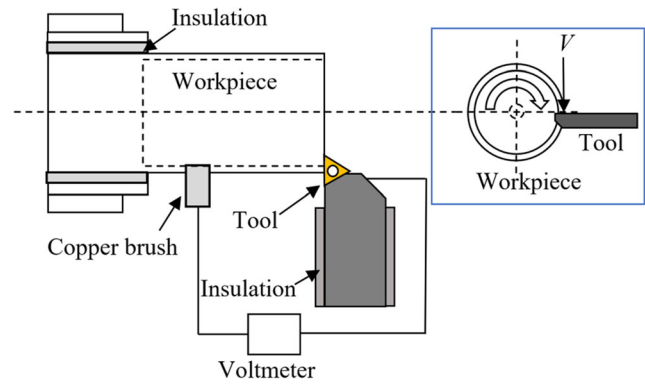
Schematic view of temperature measurements at the tool-chip interface using intrinsic thermocouple technique [31]
